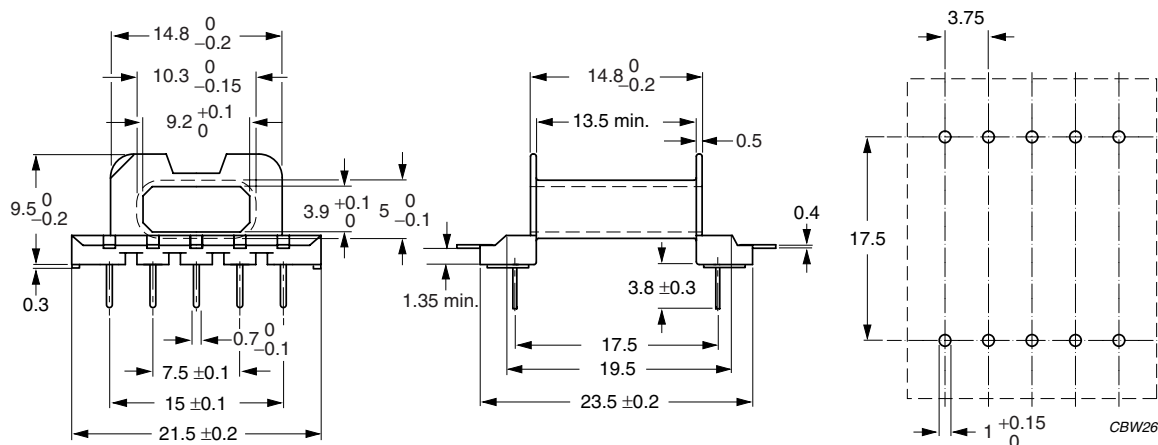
EFD20/10/7 coil former (PCB); 10-pins.
